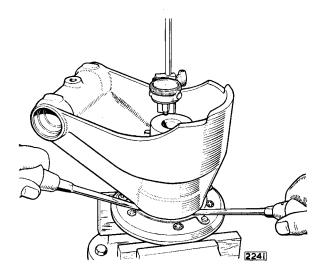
Checking the hub bearing end-float with a dial test indicator (Churchill Tool No. J.13)
